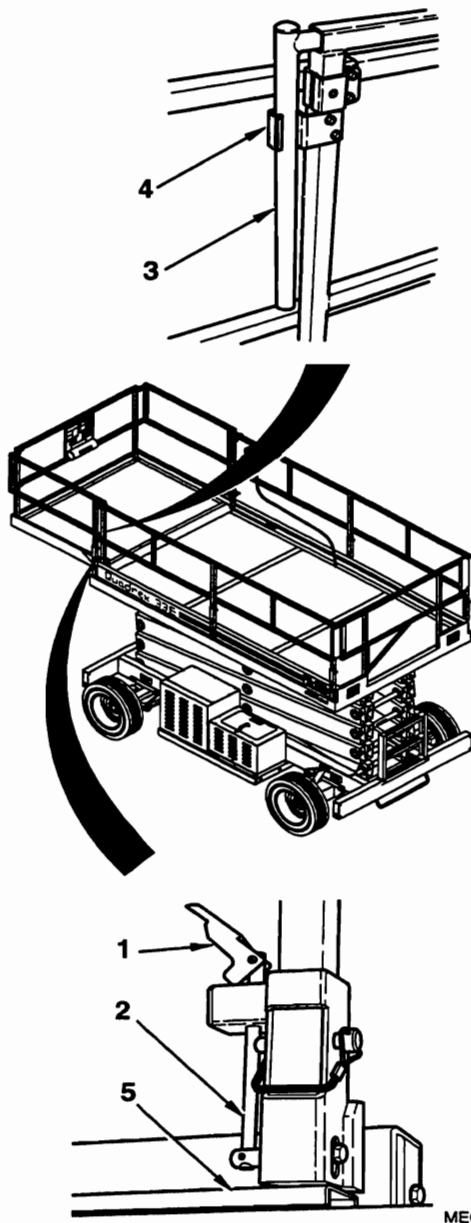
Extended Platform Lock Assemblies and Extension Handles
